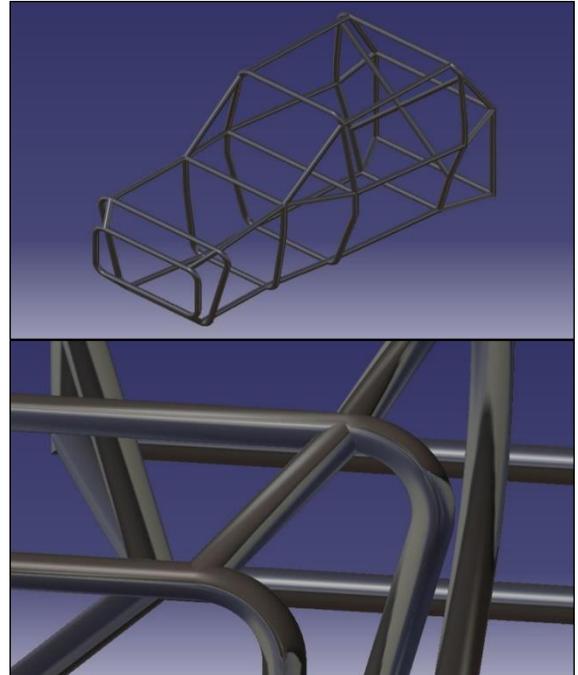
Fig II. Model of Frame; Circular Cross Section of Tubular Space frame
